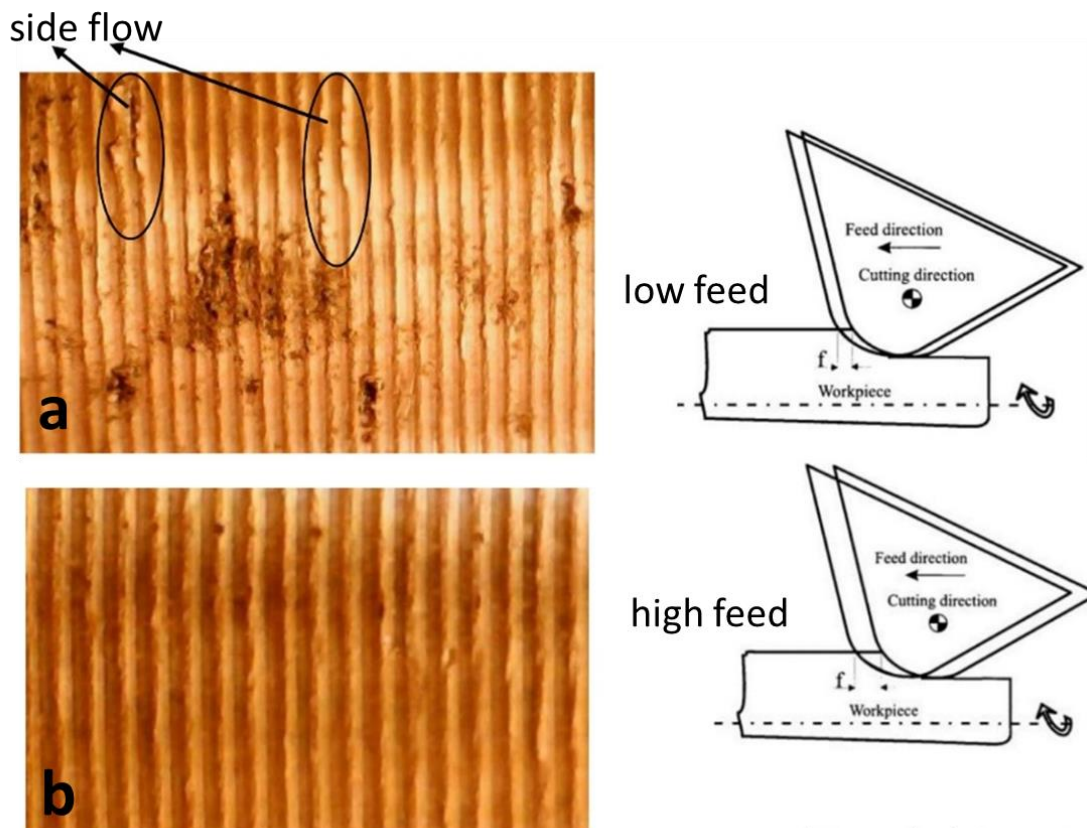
The morphology of the workpiece surface at various feed rates, a. $f = 0.05 \frac{mm}{rev}$, b. $f = 0.15 \frac{mm}{rev}$
